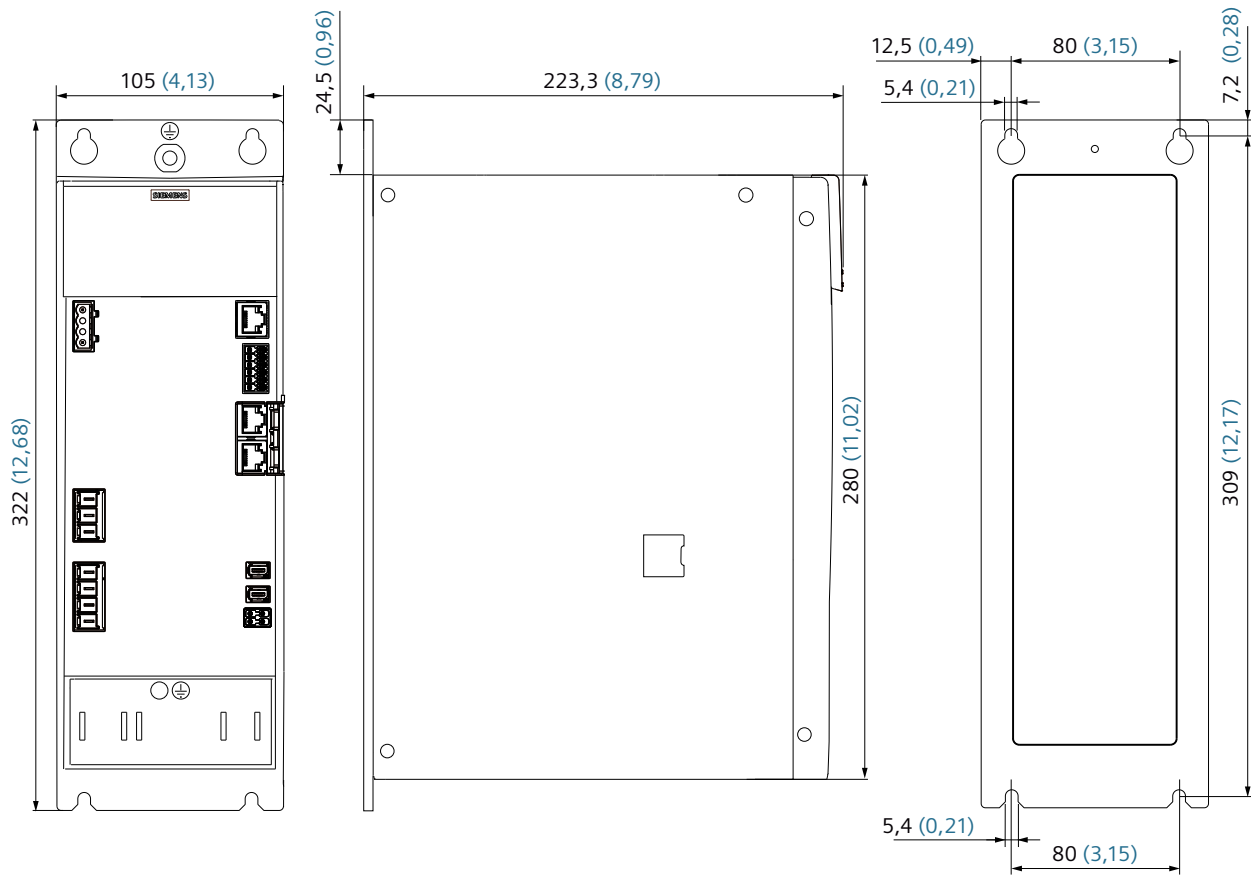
Dimension drawing SINAMICS S210 FSC, 3 AC, dimensions in mm (inch)
